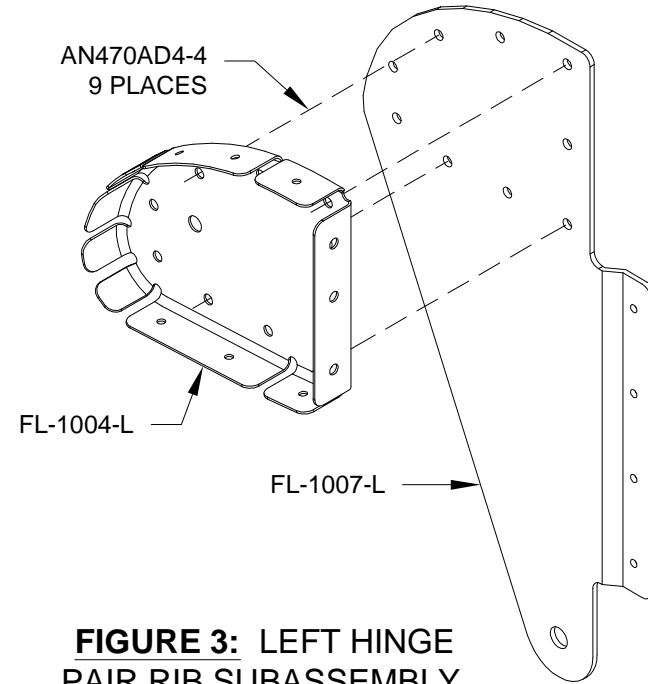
LEFT HINGE PAIR RIB SUBASSEMBLY
